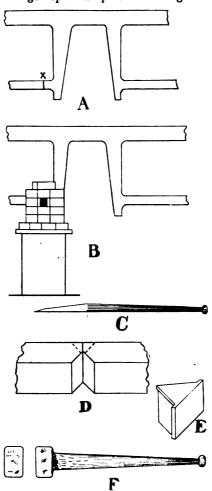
TOOLS USED IN WELDING LOCO-MOTIVE FRAMES.
